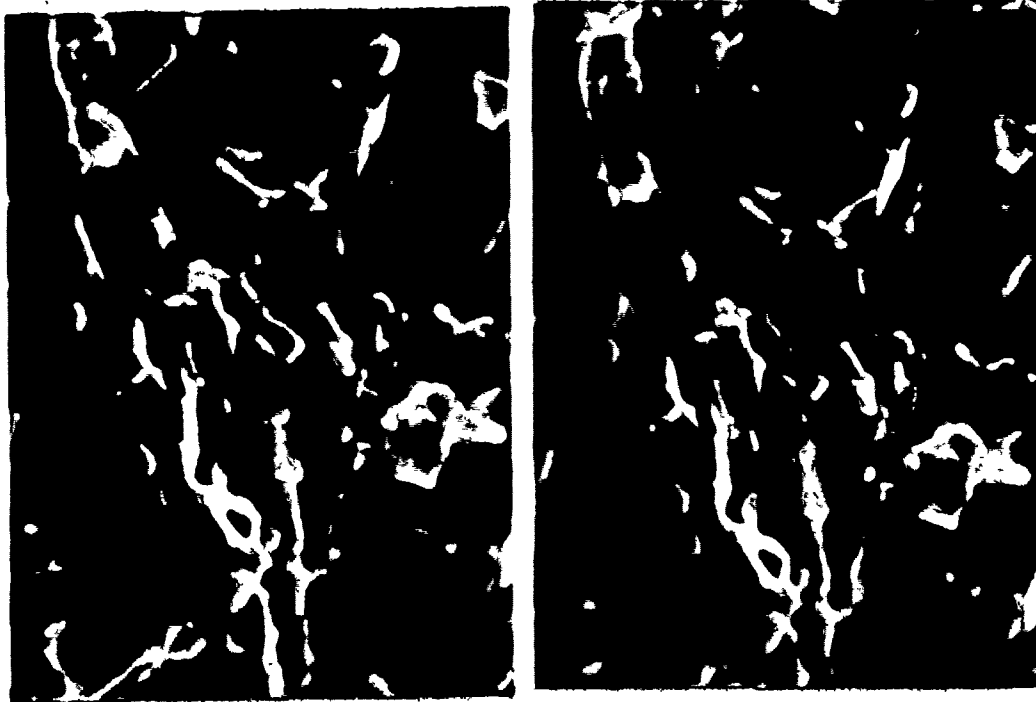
Stereo picture of fracture surface of K45 carbide grade tool used for machining 4340 steel (217 BHN), (X5900).
